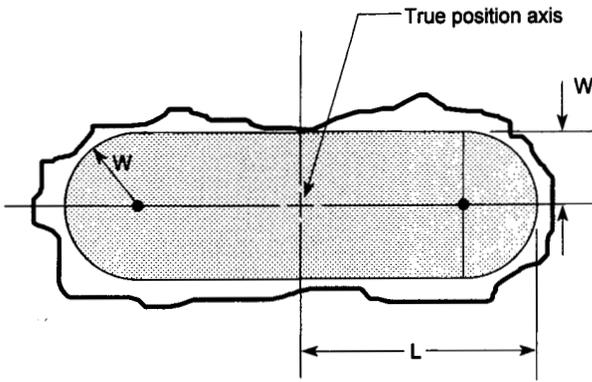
TOLERANCE ZONE AND CONFORMANCE; ELONGATED HOLE AT MMC. THE TOLERANCE ZONE IS A RIGHT CYLINDER SHOWN IN CROSS SECTION
